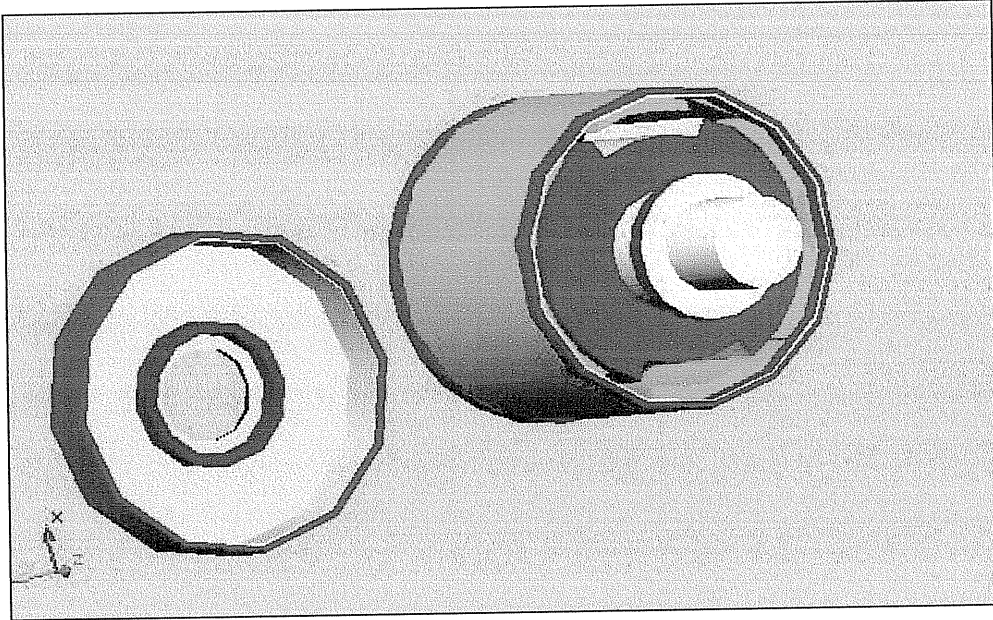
Crosse section of the rotor and stator and cover and bearing house
